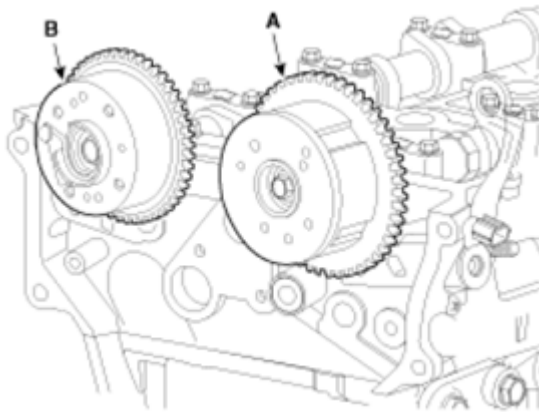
Intake & Exhaust CVVT Assemblies (Dual CVVT)
